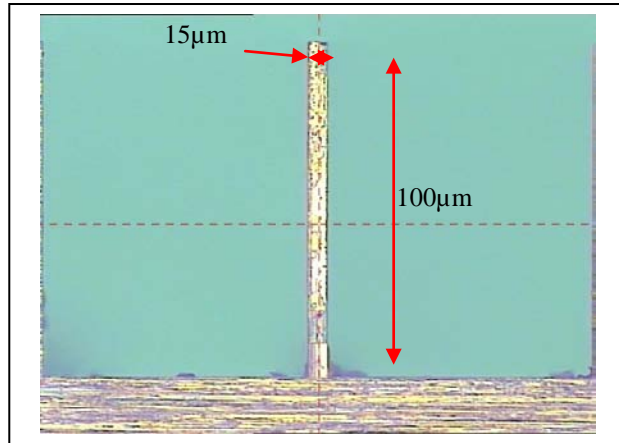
Micro channel on brass without burrs using 400  $\mu\text{m}$  diamond milling tool
